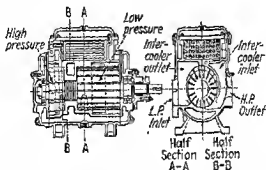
Two-stage Sliding-vane Compressor. (Allis-Chalmers "Ro-Twin.")
